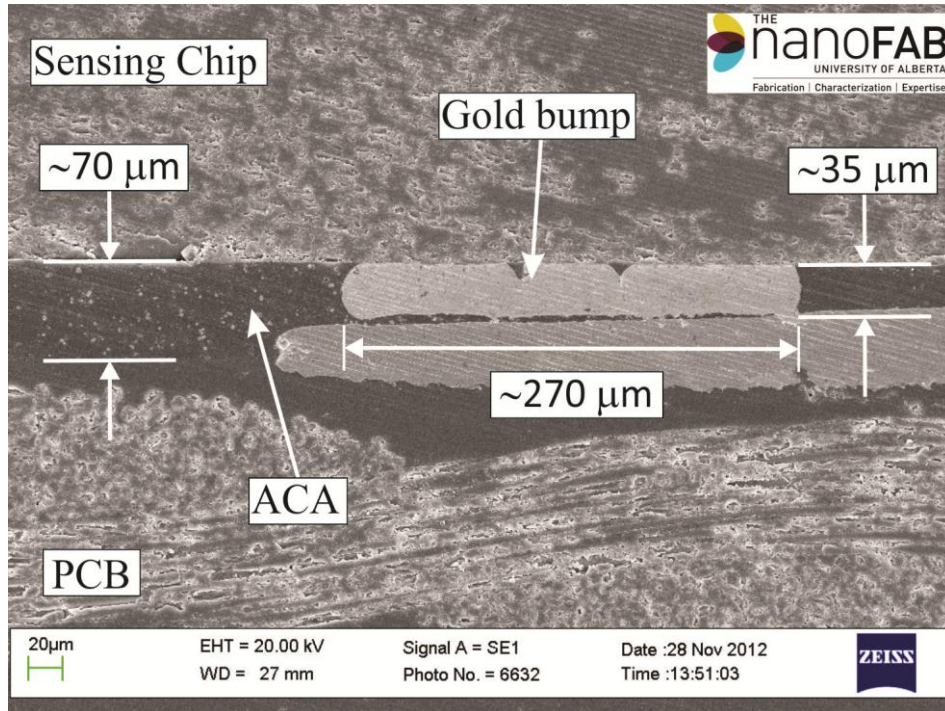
SEM image of the PCB/Chip cross-section showing the ACA, gold bump and copper trace thicknesses
